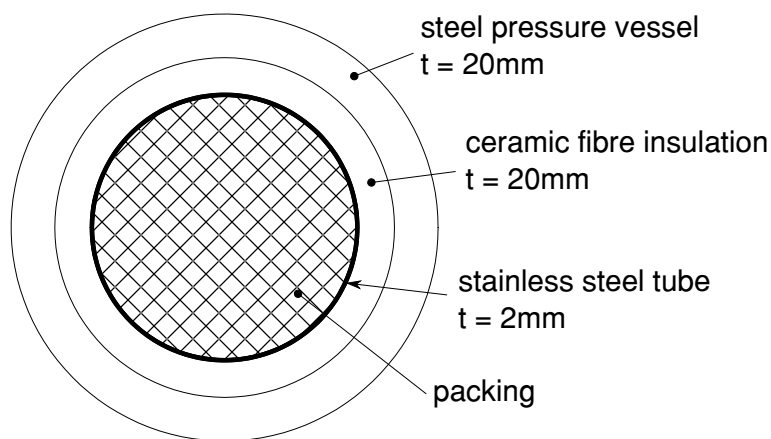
Cross section of packed column assembly showing the pressure vessel, insulation, containment tube, and packing.
